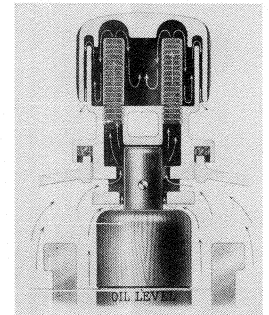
Cross-section drawing showing venting method of pole- and pothead-type cutouts. Arrows show path of escaping arc gases.
